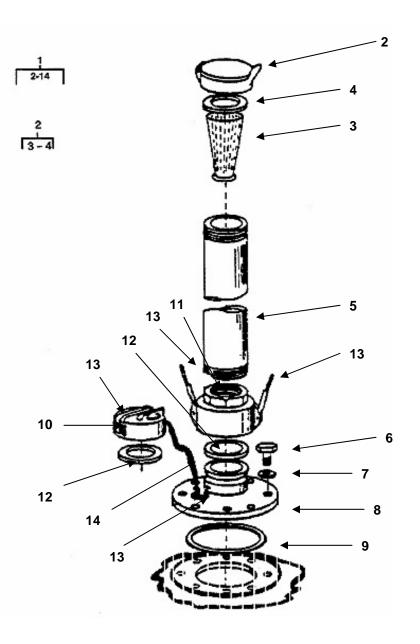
Vent Fitting Assembly (Models BA91-142, PD5430-001 and RCF0210000)
